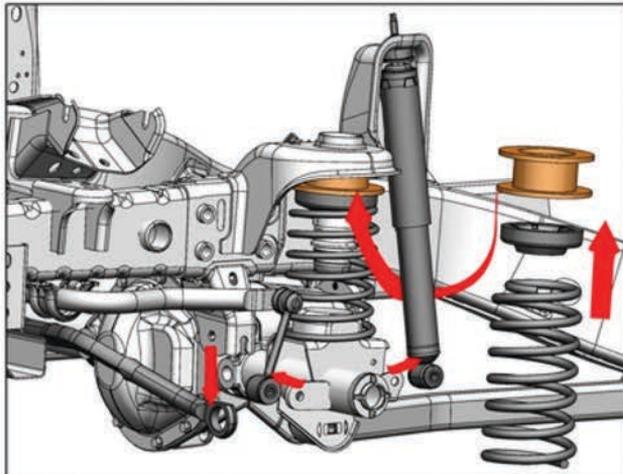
Figure A: Illustration is for reference only. Part dimensions will vary from kit to kit.
